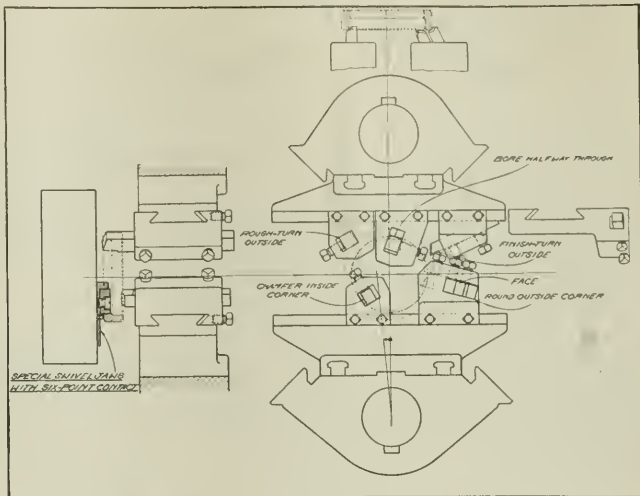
Diagrammatic Illustration of the Tooling on the Machine shown in Fig. 11
